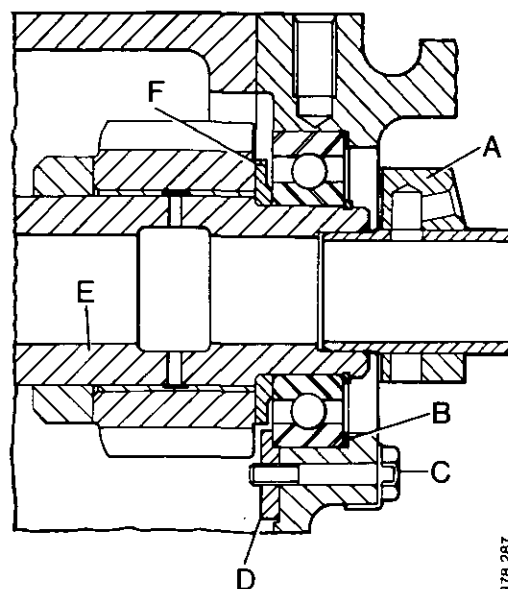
BEVEL PINION SHAFT ASSEMBLY
